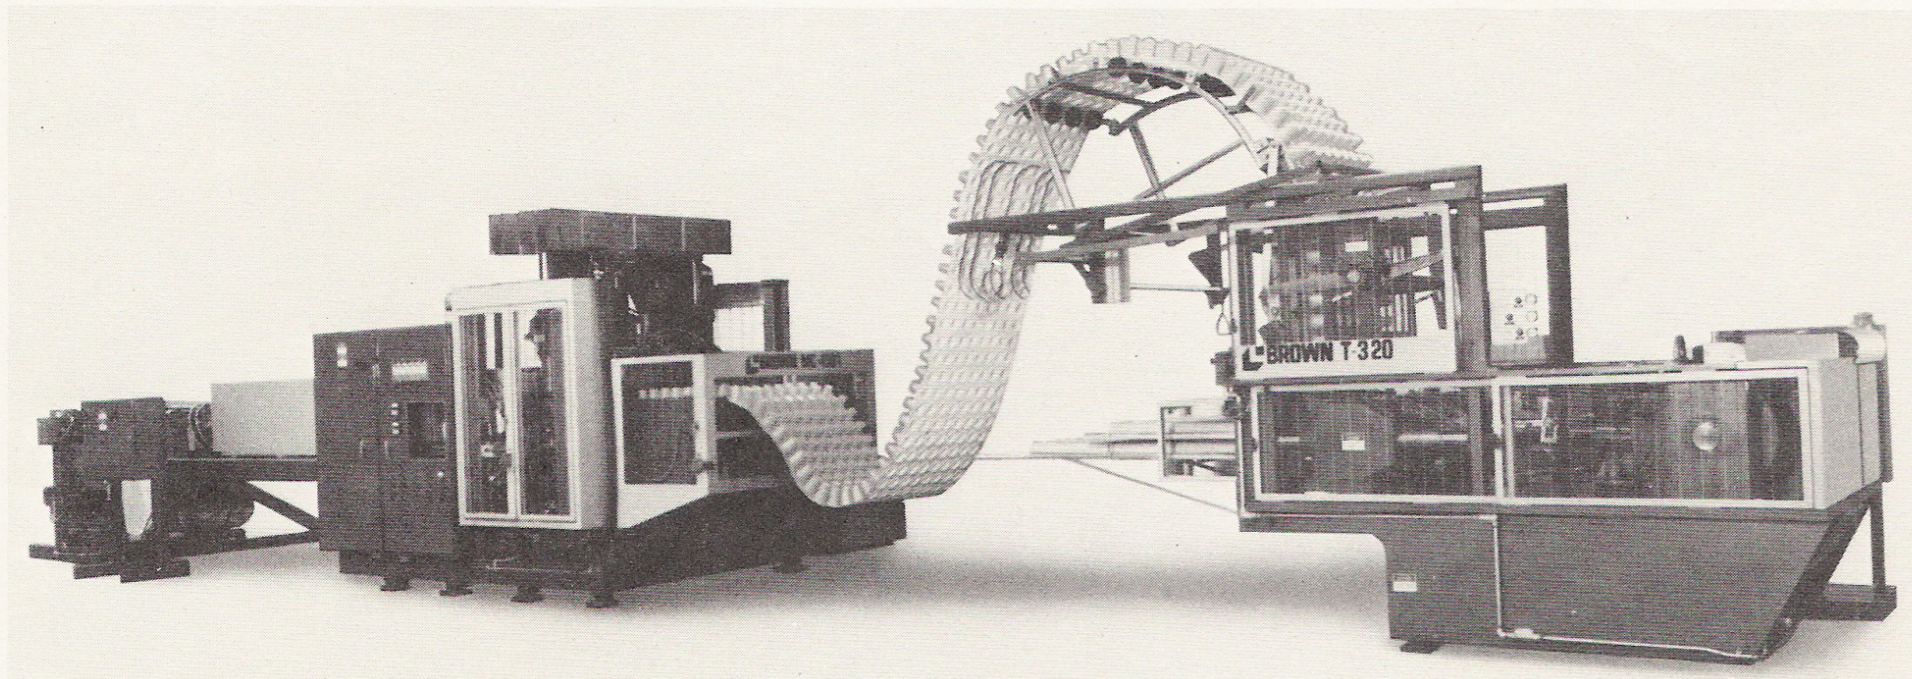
An automatic vacuum former for forming, filling, and sealing containers and blister packages.
